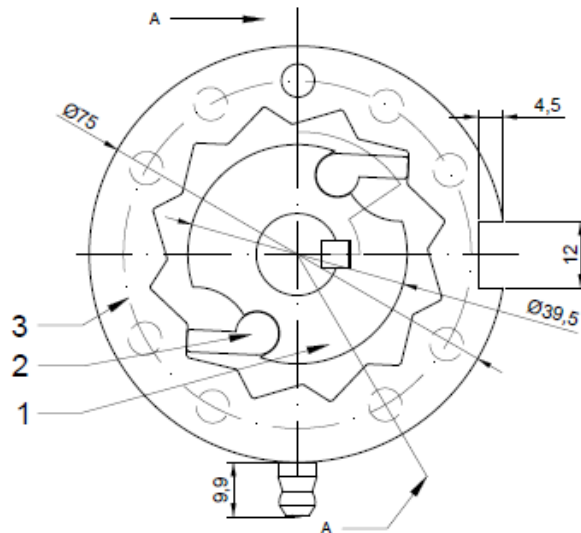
Front view of the freewheel system (1-Inner part; 2-metal teeth; 3-outer part)
